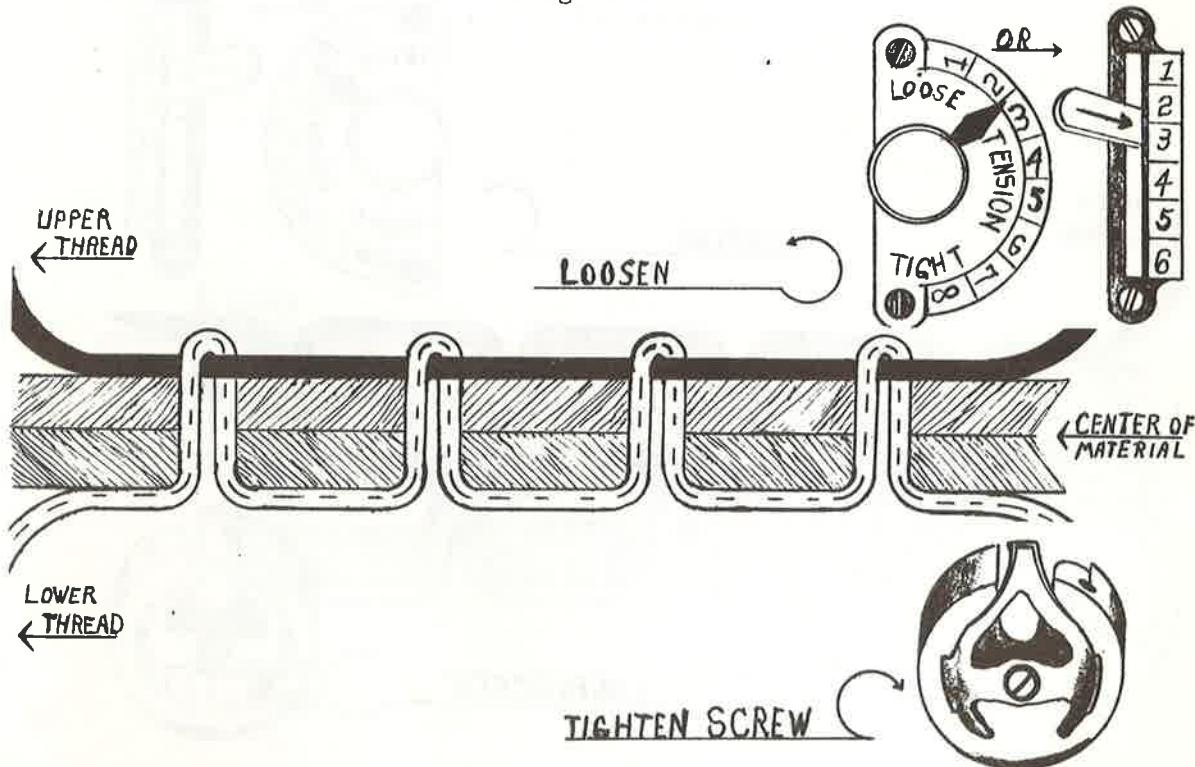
illustrates sample stitch where lower thread is pulling upper thread down through material, or the upper thread is hanging up due to a malfunction in the lower sewing mechanism.
